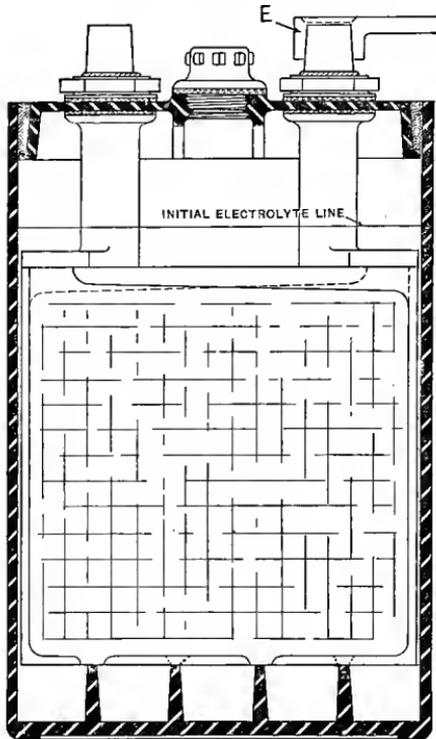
Cell Assembly with Flanged and threaded Strap and Terminal Post.
